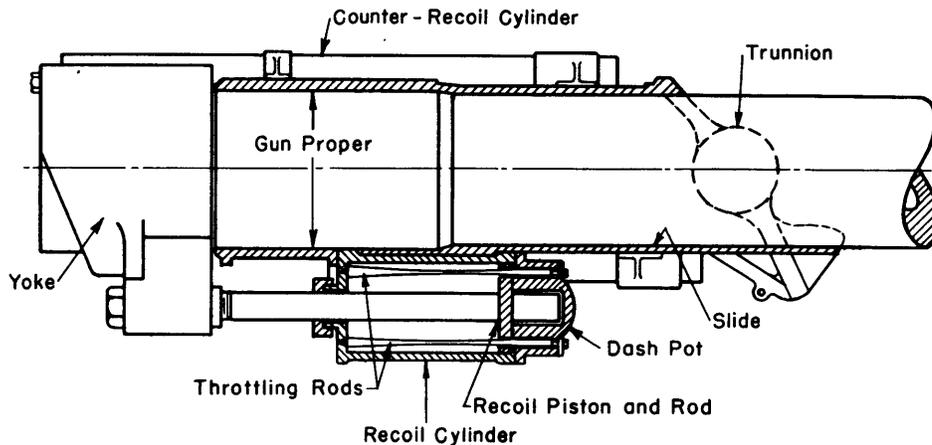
Mounting and Recoil System of a Major-Caliber Gun
